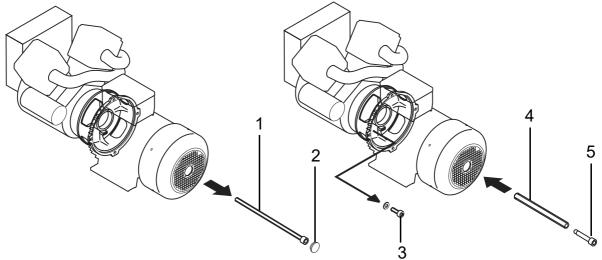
Disassembly of single-bearing brush generators with tension bolt
